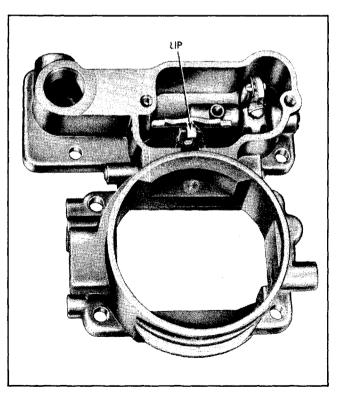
B-28 Installing Vacumeter Piston Link-Carter
